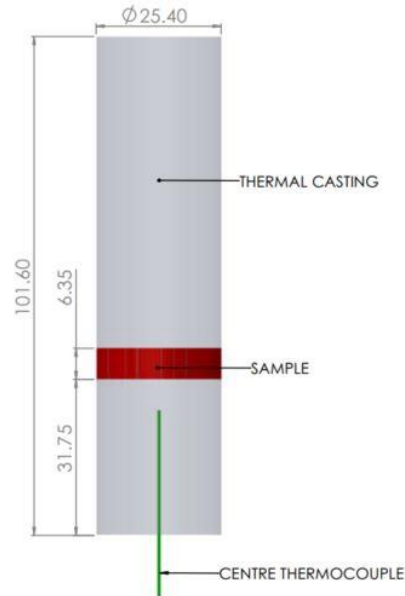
Grain size evaluation specimen extraction from thermal mold castings (all units in mm)
